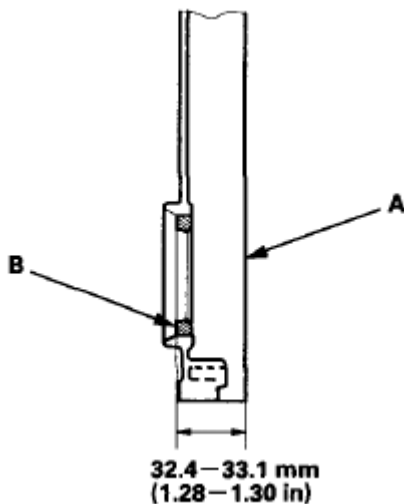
Identifying Distance Between Chain Case Surface And Oil Seal
